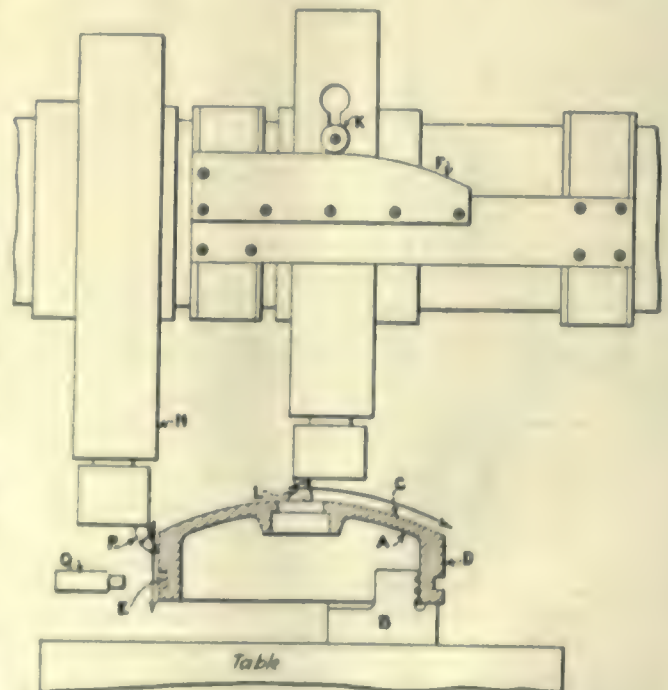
SPHERICAL TURNING ATTACHMENT FOR VERTICAL TURRET LATHE
